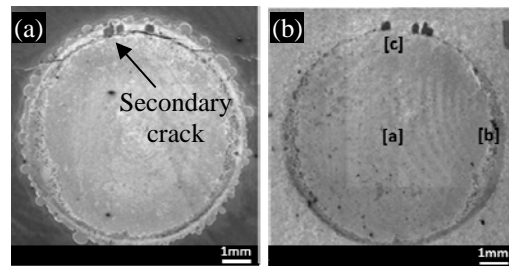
SEM macrographs of tensile fracture surface of dissimilar weld: $P_{max}=2000N$, $N_f = 1.0 \times 10^6$ cycle, (a) al side (b) steel side.
